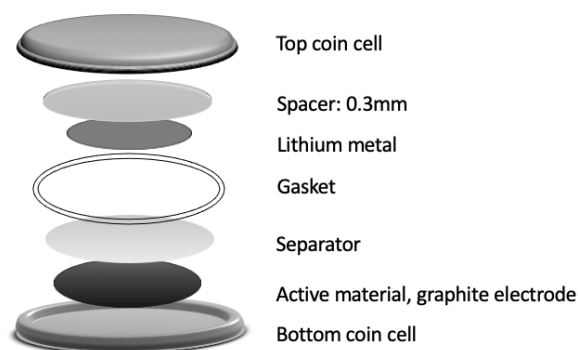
Components used in a coin cell and it's assembly [\[19\]](#).
